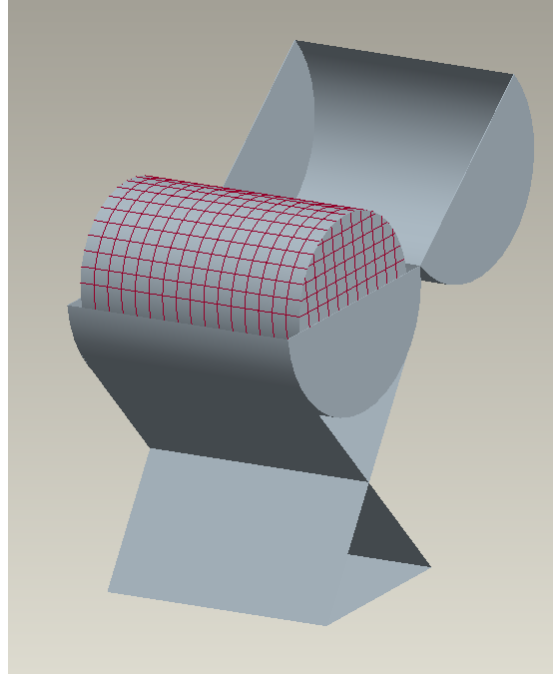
55 Gallon Drum Tumbler Pro-E Drawing
